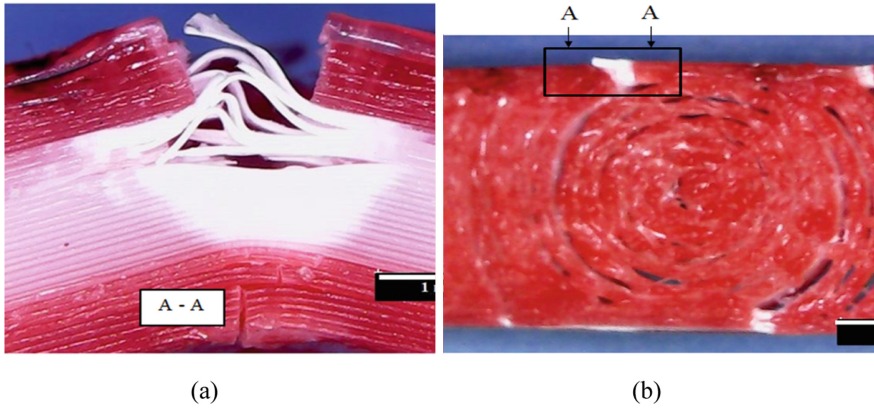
Fracture in the test specimen with infill pattern type archimedean chords, (a) side view, (b) upper view
